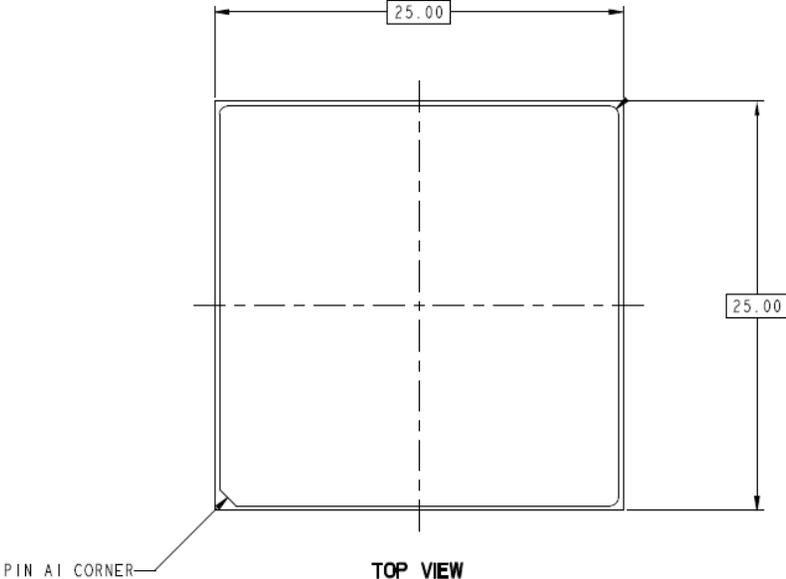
Simplified FCBGA1723+HS outline drawing
